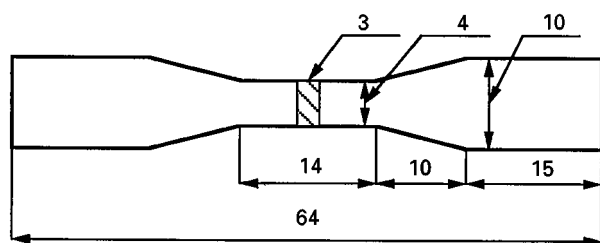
The geometry and dimensions of cyclic tensile test specimen (in millimetres).
